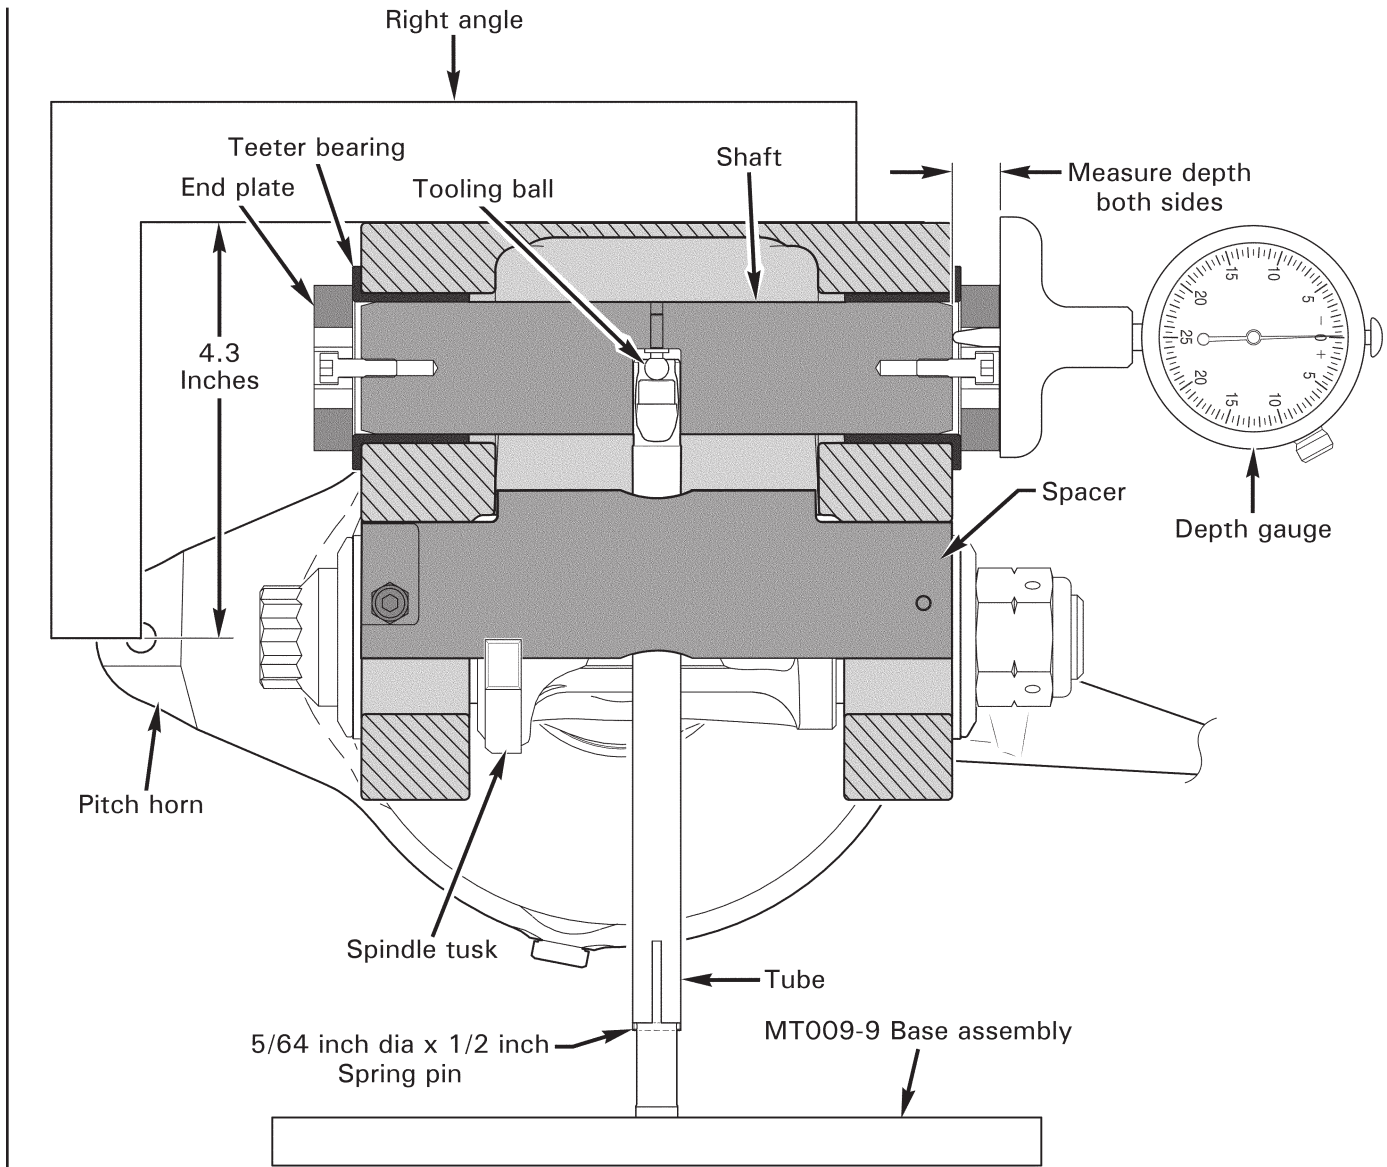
B MEASURING GAP BETWEEN THRUST WASHER AND HUB BEARING
